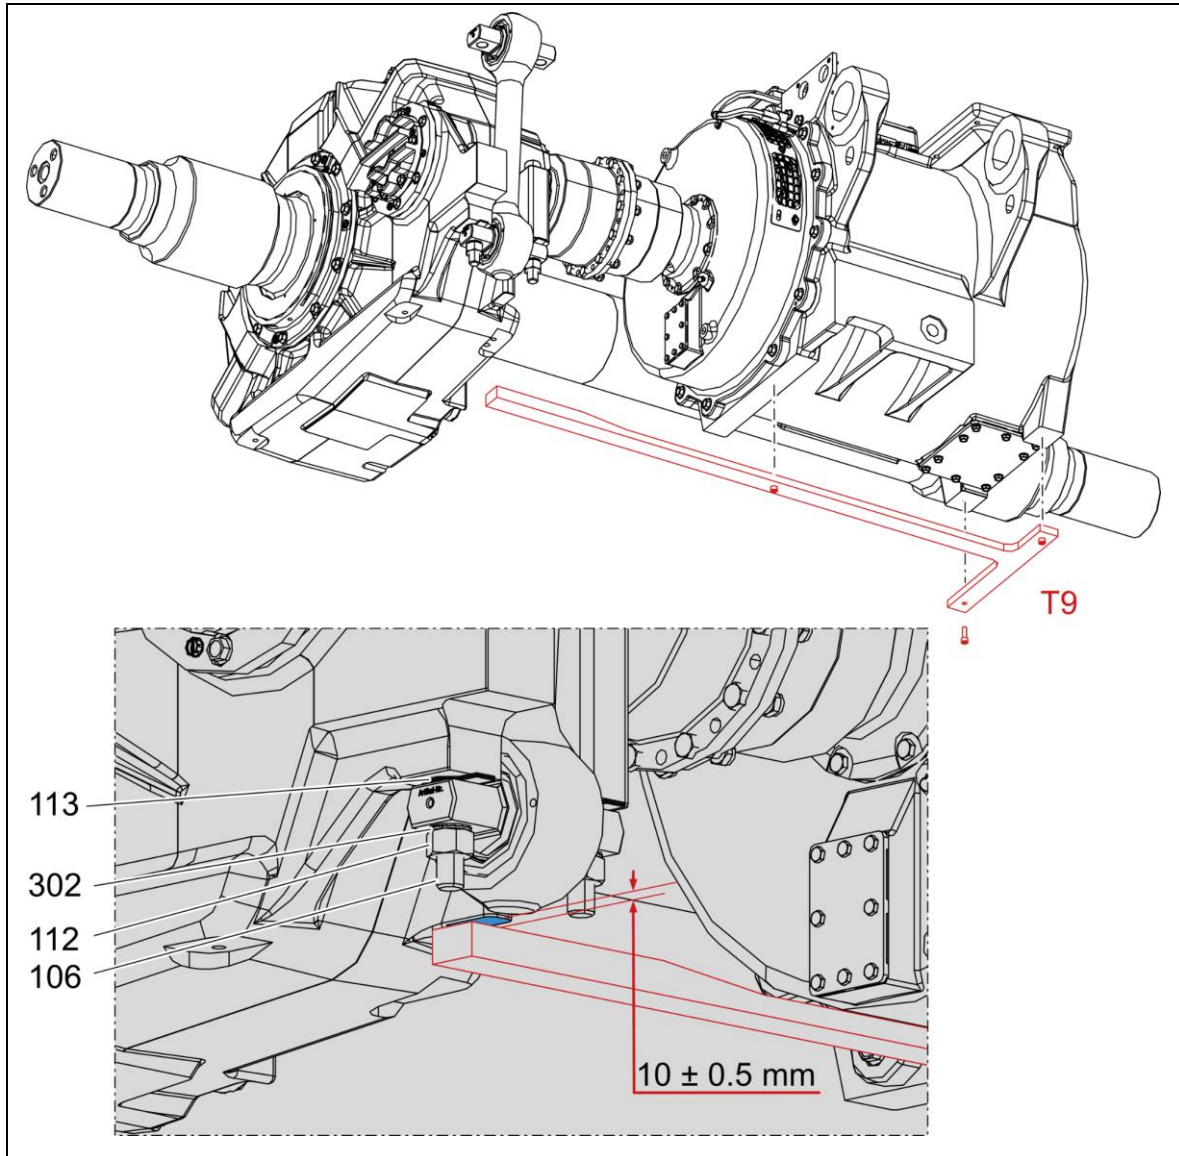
Checking and adjusting height of Traction Gearbox to Traction Motor
